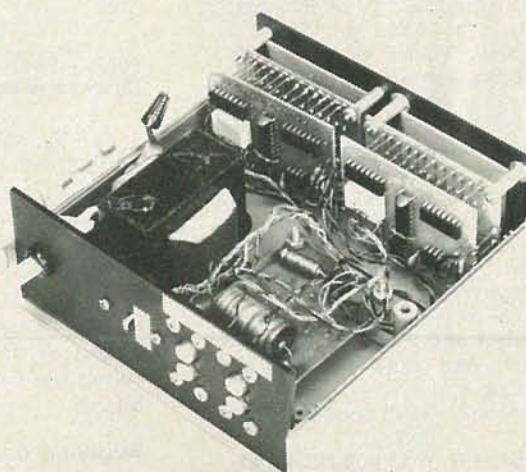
INTERIOR VIEW of the prototype stereo VU meter. Note how the two circuit boards, meter face, and front panel go together.
